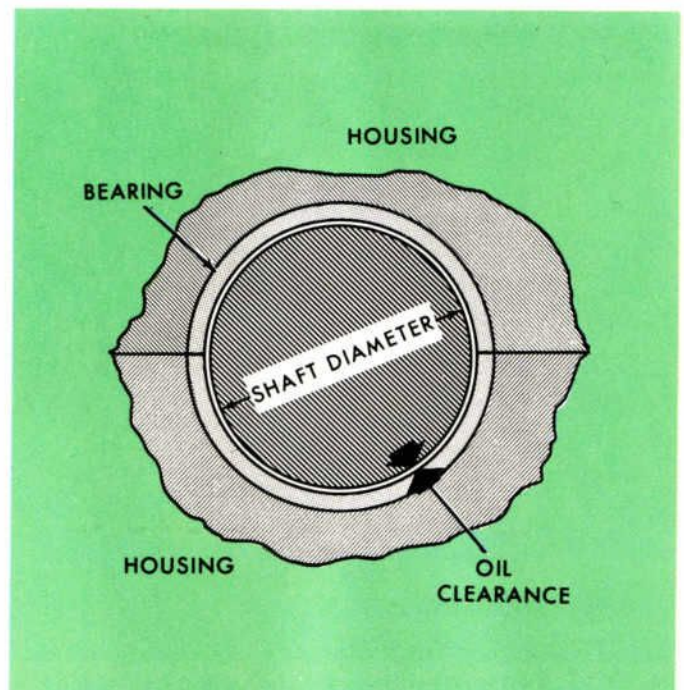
BEARING-TO-SHAFT OIL CLEARANCE
